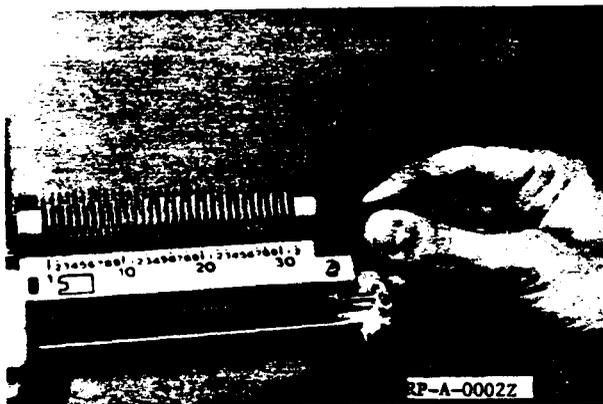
REMOVING BLADES (PAR. 7.1.2.1)
